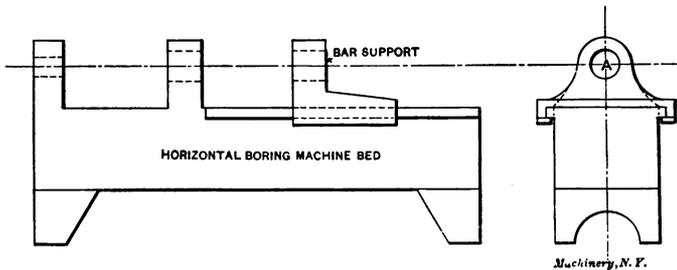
A Case where some Machine Work is done after the Work is partly assembled
